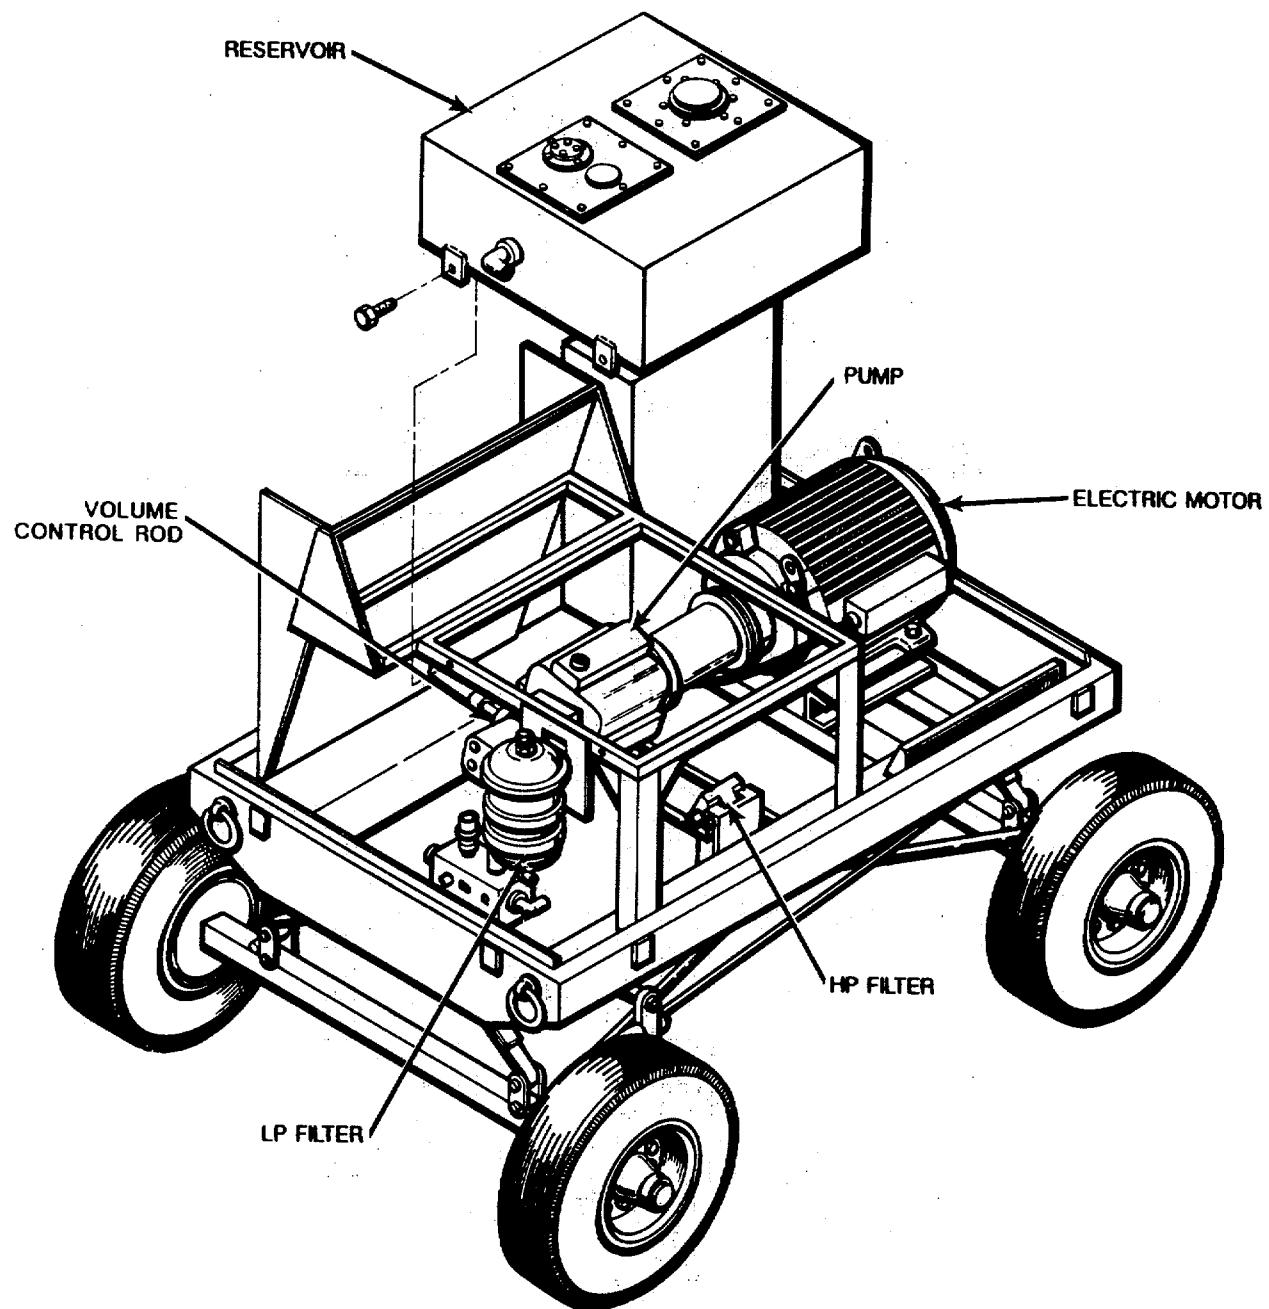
Test Stand Hydraulic System Electric Motor Drive, Type D-6A Major Internal Components
